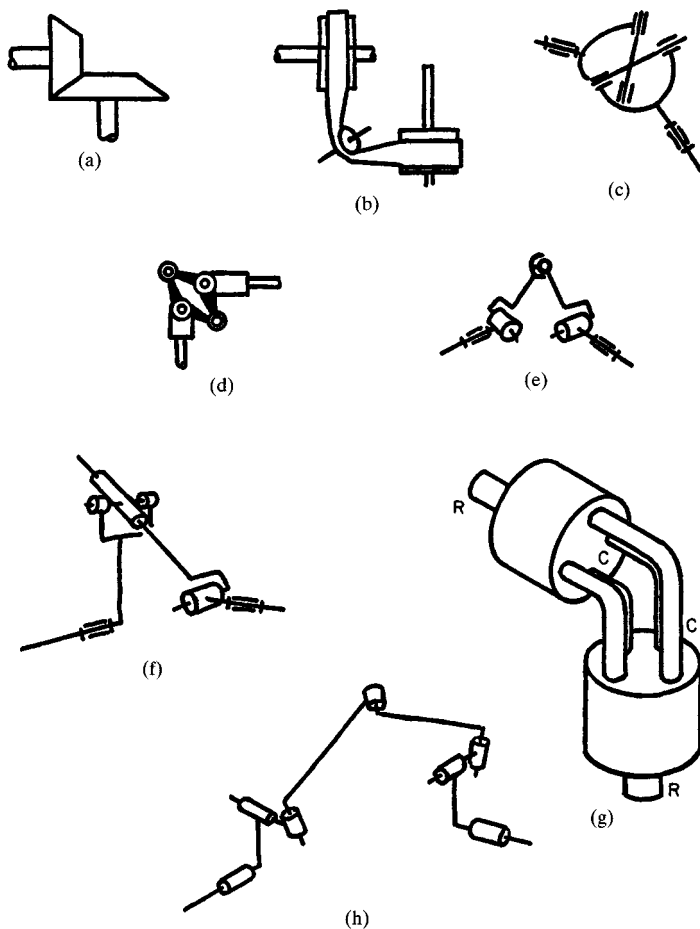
Couplings and connectors—intersecting shafts. (a) Bevel gears; (b) flat belts with idlers; (c) Hooke joint; (d) Hooke's coupling; (e) Clemens coupling; (f) Rouleaux coupling; (g) spatial RCCR; (h) Hunt's constant-velocity coupling.
